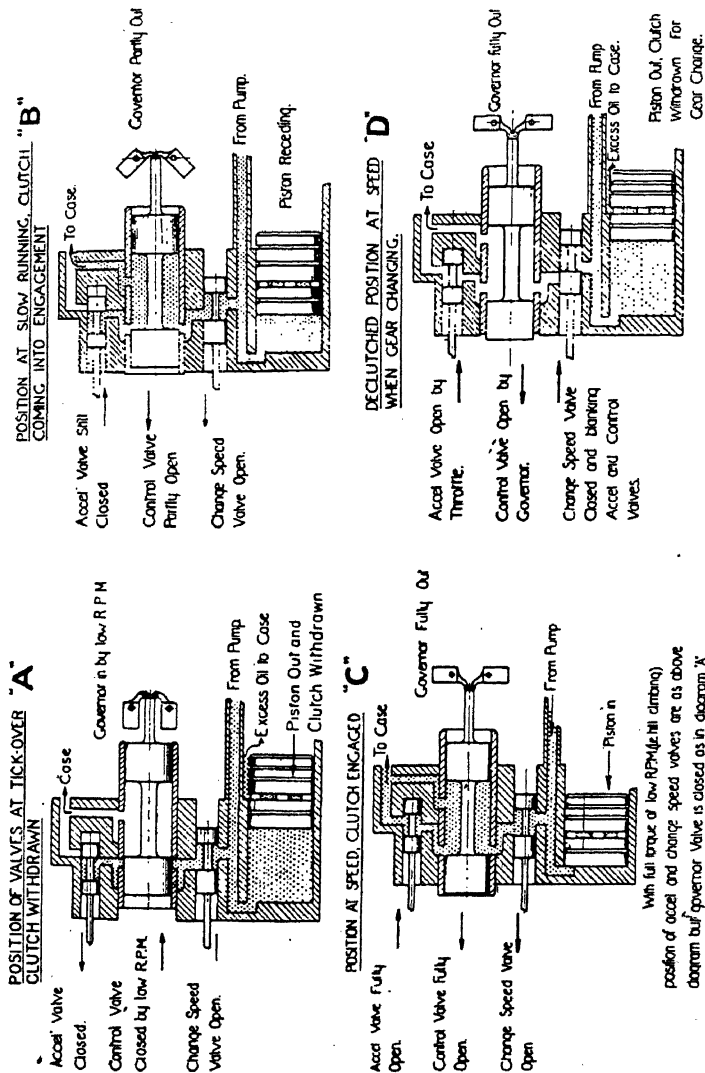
Illustrating Gillett Automatic Clutch Control Principle.
